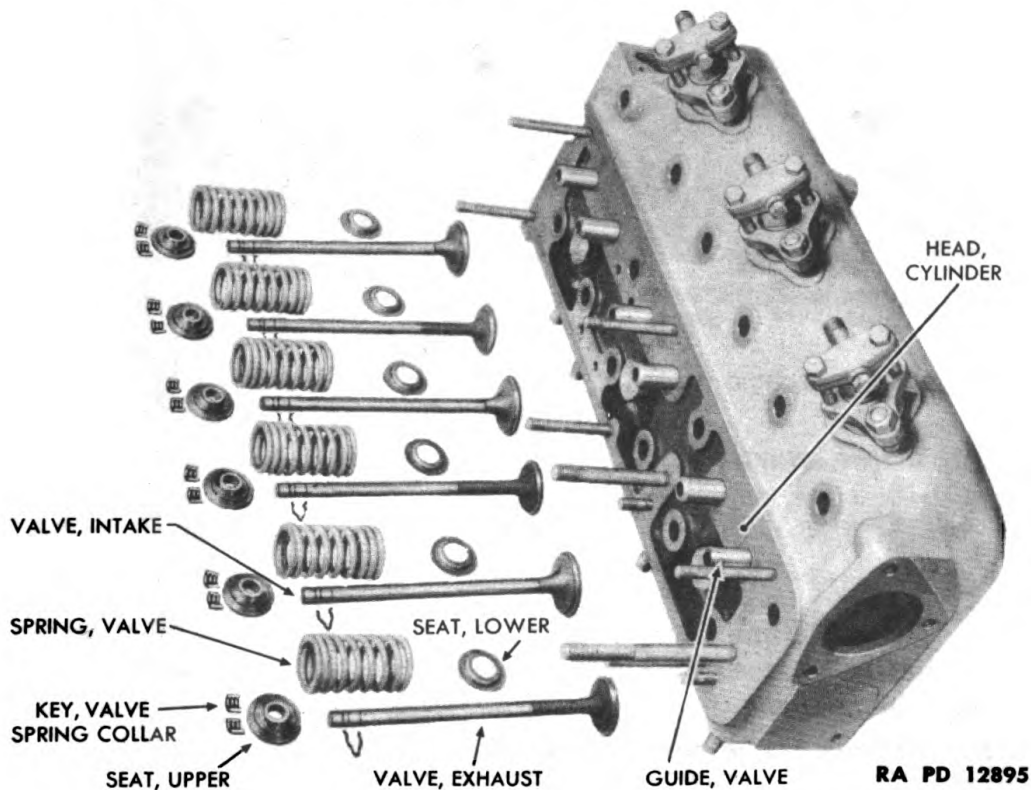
Removed Intake and Exhaust Valve and Related Parts
